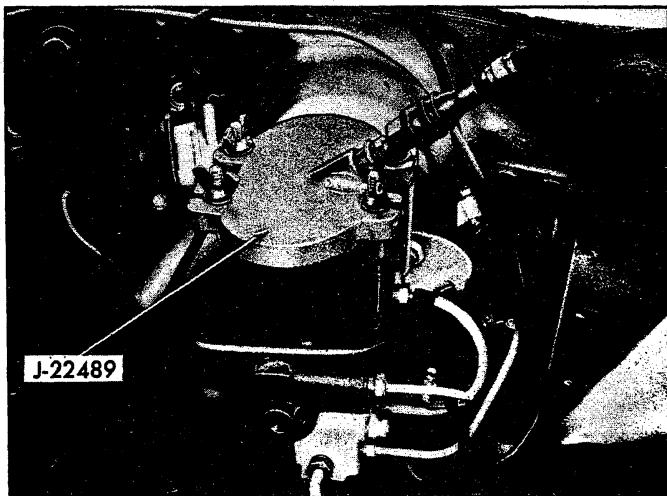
Brake Bleeder Adapter Tool J-22489—Installed
